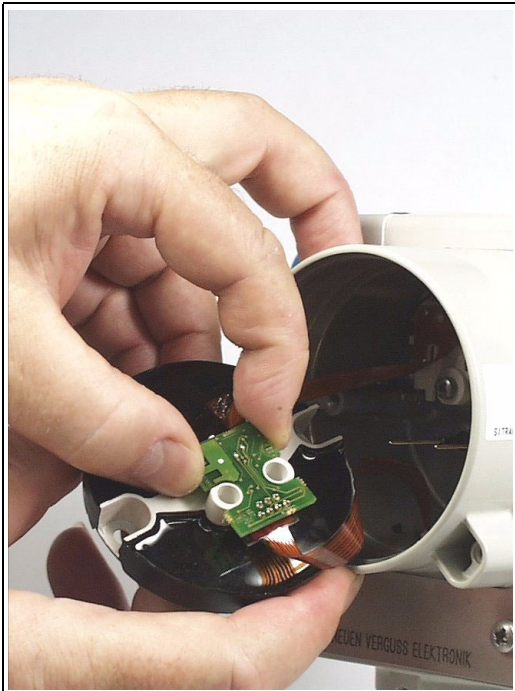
Pull off the measuring cell board with the correct tool as of product release 30
